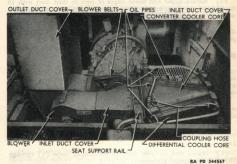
Oil Cooler, Blower, and Oil Pipe Connections—M39
